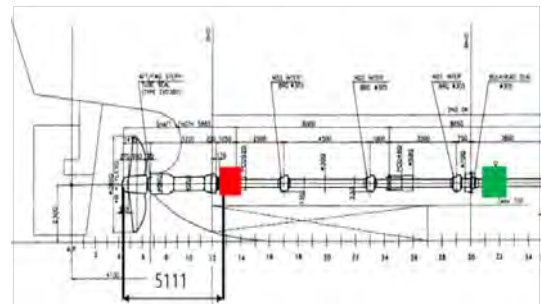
Shafting arrangement and allocation of the strain gauge and the laser tacho sensor
